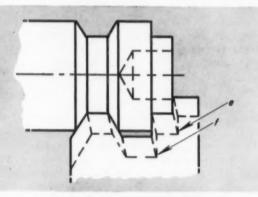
Positive side clearance can be maintained on entire tool shown in Fig. 1 by applying side clearance to surfaces e and f.
